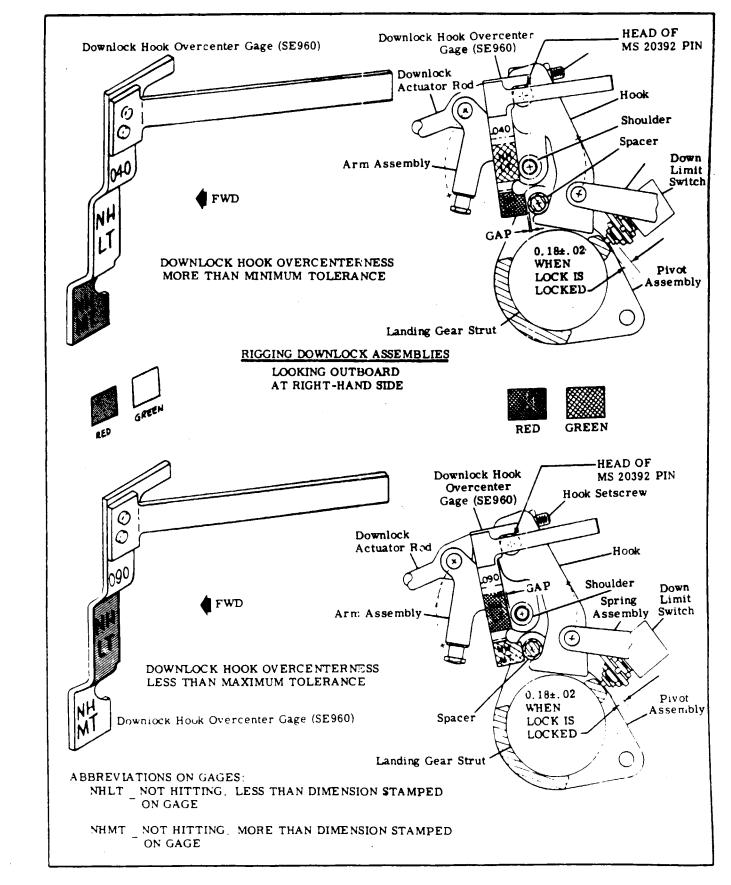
A-10. Rigging Miin Landing Gear (Sheet 2 of 3)
